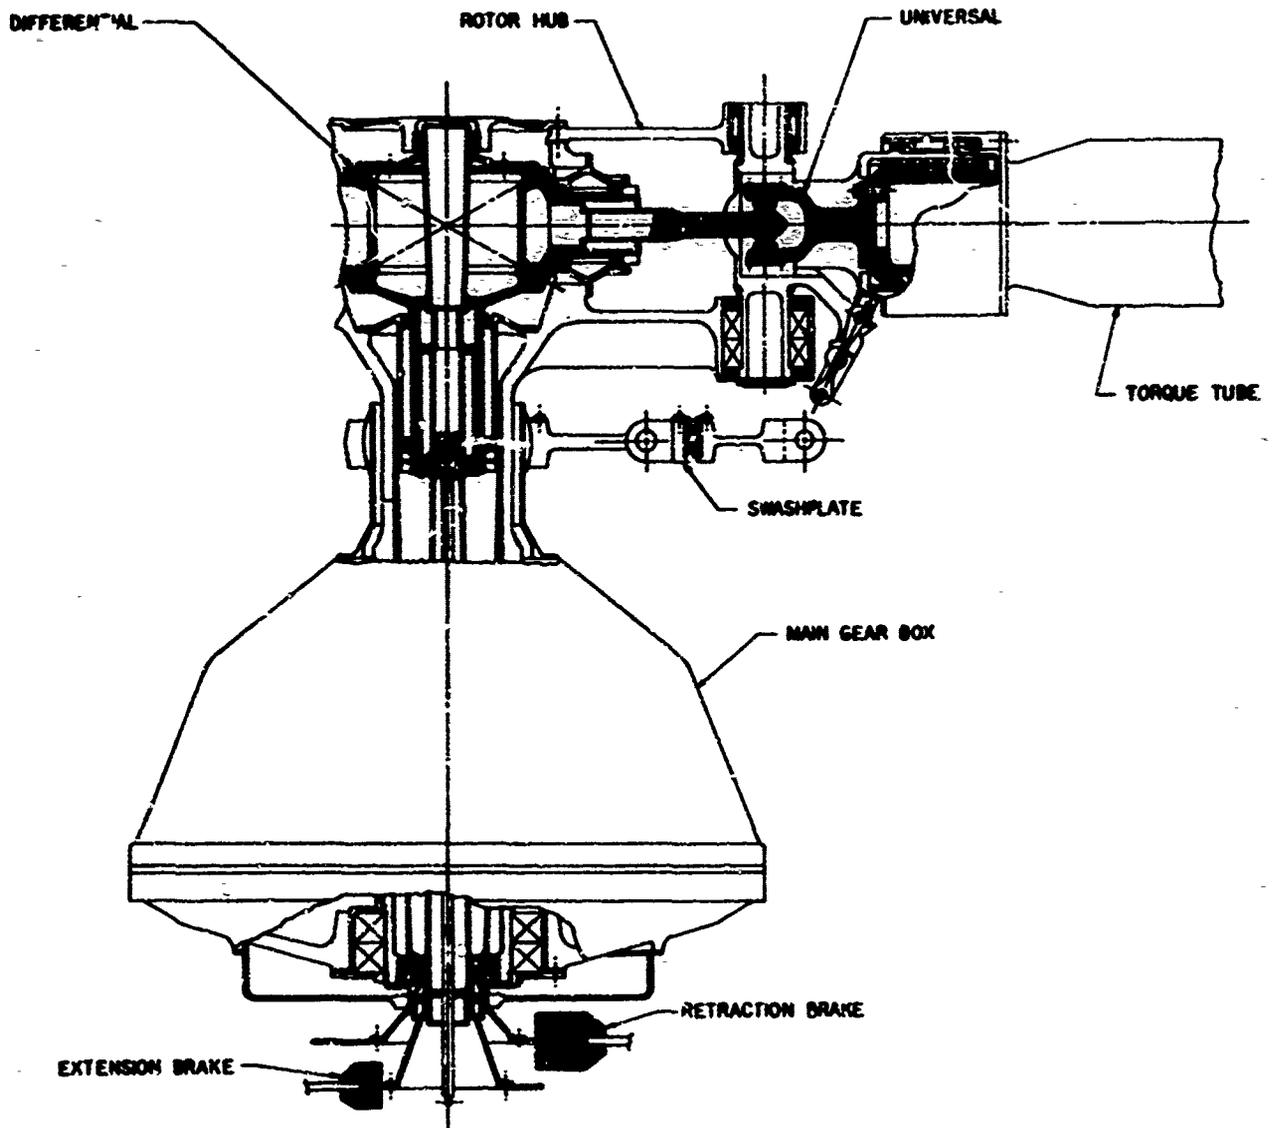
TRAC ROTOR HEAD AND TRANSMISSION SCHEMATIC DRAWING
